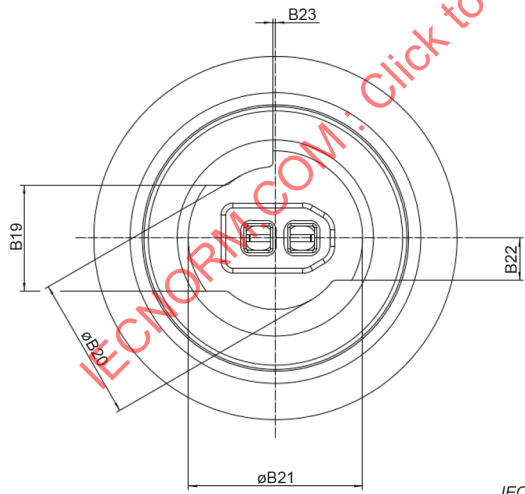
shows a connector with female contacts and Table 6 shows the related dimensions.
